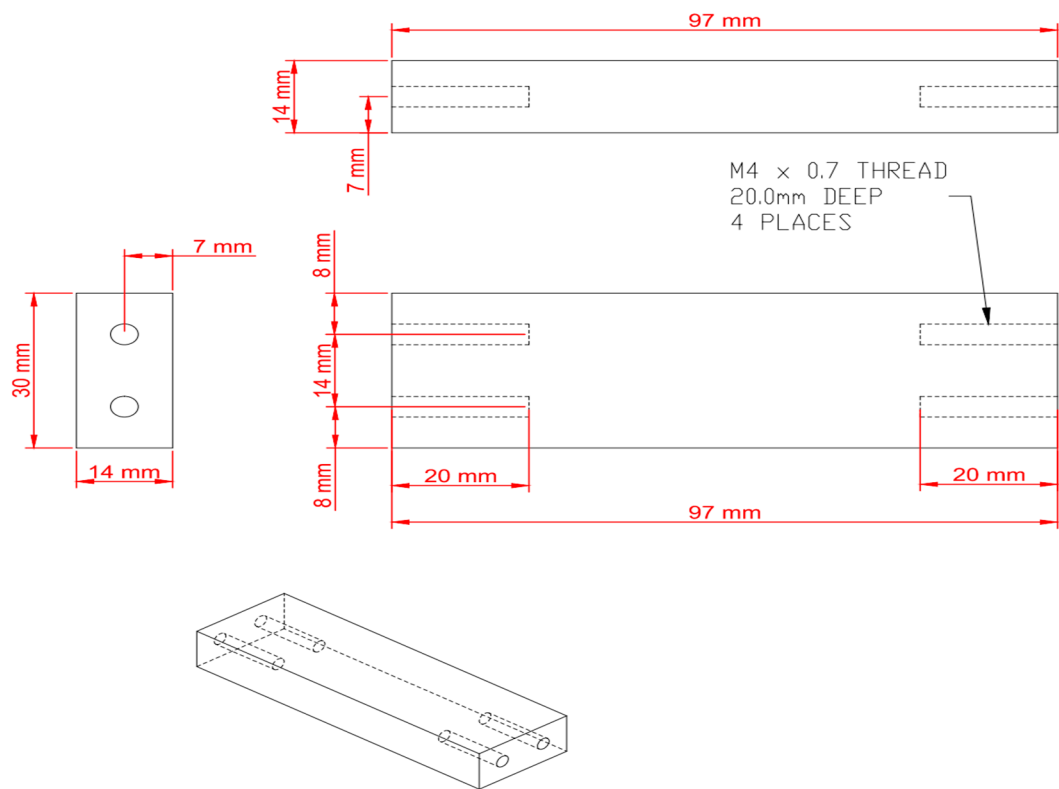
Detailed mechanical drawing of Part 8a and 8b from Figure S1. Part 8a and 8b are identical.
